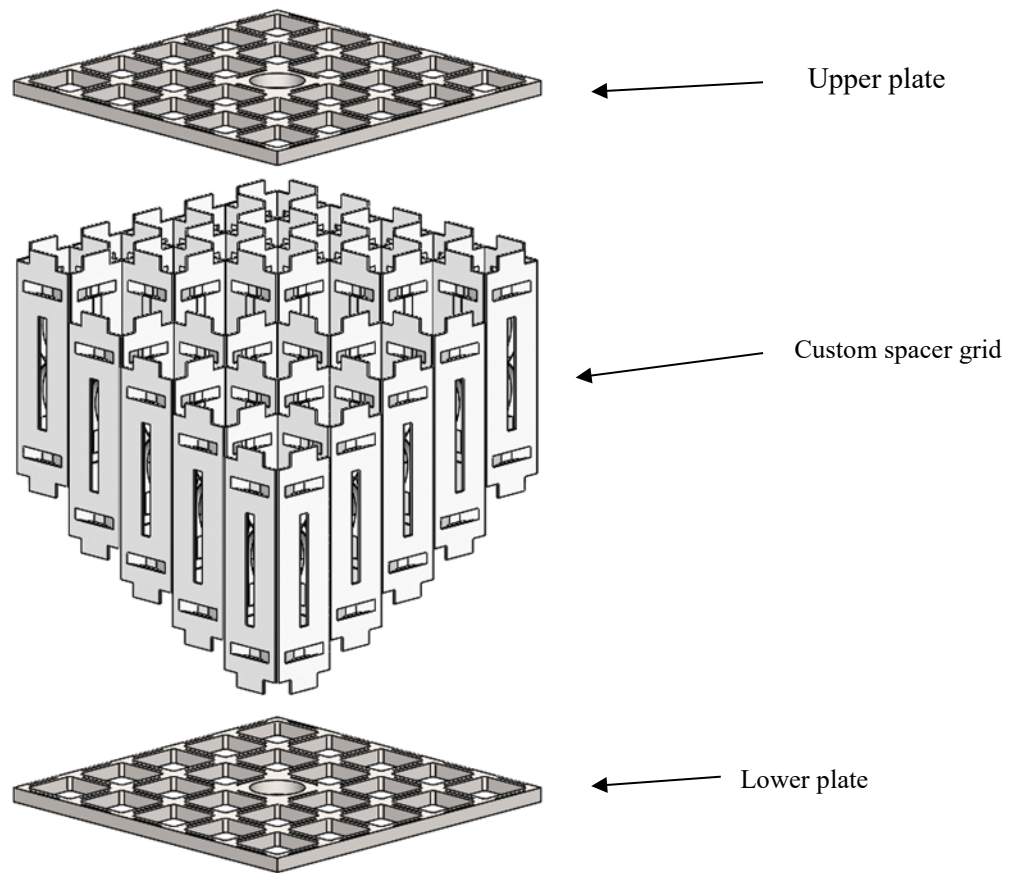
Exploded View of the Custom Spacer Grid Assembly.
